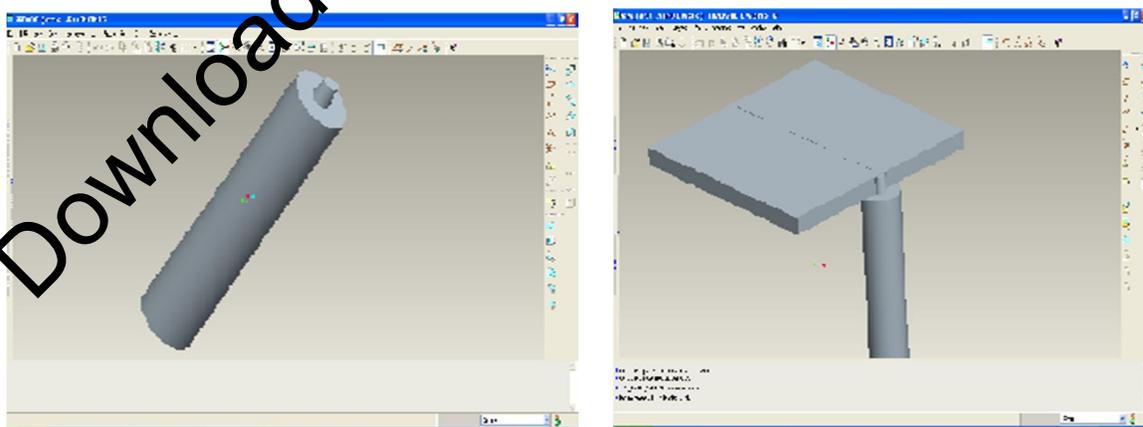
Round taper Tool and plates for friction stir welding
